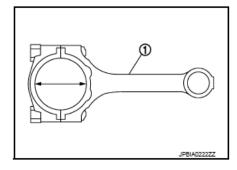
Identifying Connecting Rod Big End Diameter Courtesy of NISSAN NORTH AMERICA, INC.
